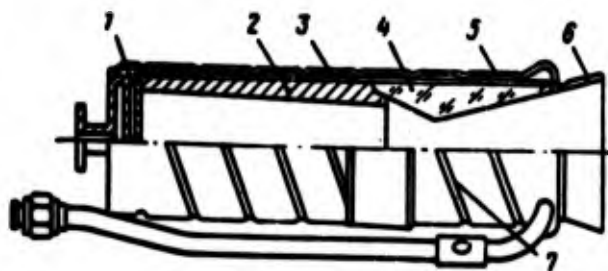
Chamber of liquid propellant rocket engine with connection of wall by welding on helical blanks: 1 - injector face; 2 - erosion liner made from refrazila; 3 - inner wall of chamber; 4 - ceramic nozzle liner; 5 - outer wall of chamber; 6 - uncooled portion of nozzle; 7 - helical blanks.
